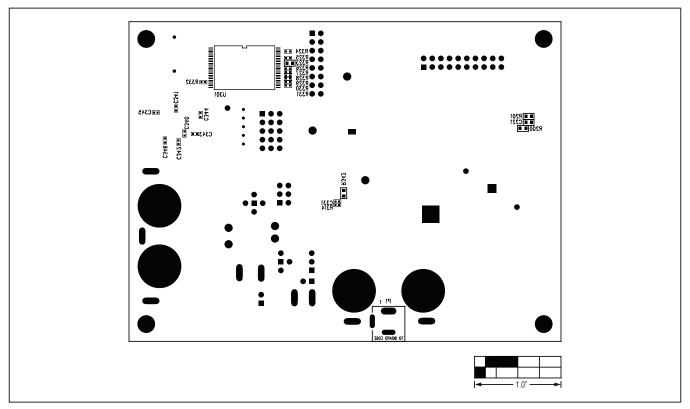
MAX98356 EV Kit Component Placement Guide—Solder Side
